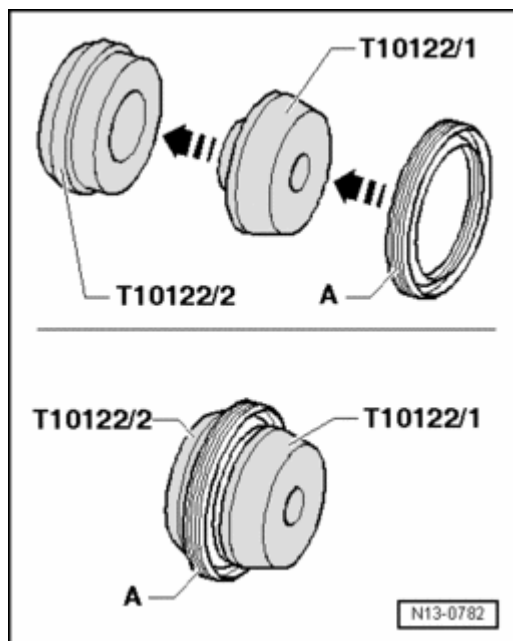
Identifying Seal, Sleeve T10122/1 And Assembly Tool T10122/2
